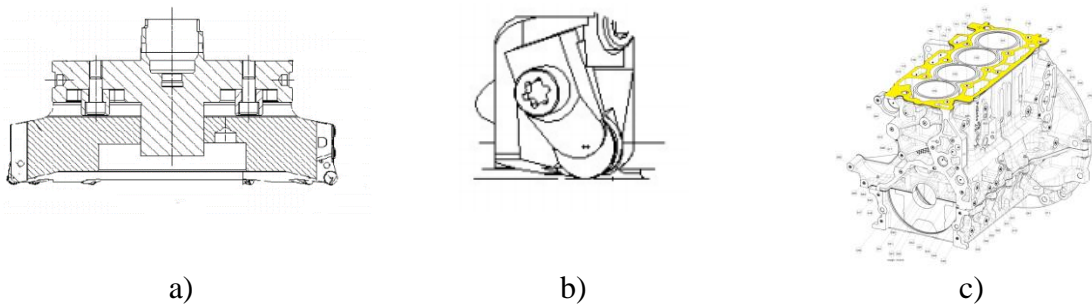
the cutting tools of the OP70 st.21.
